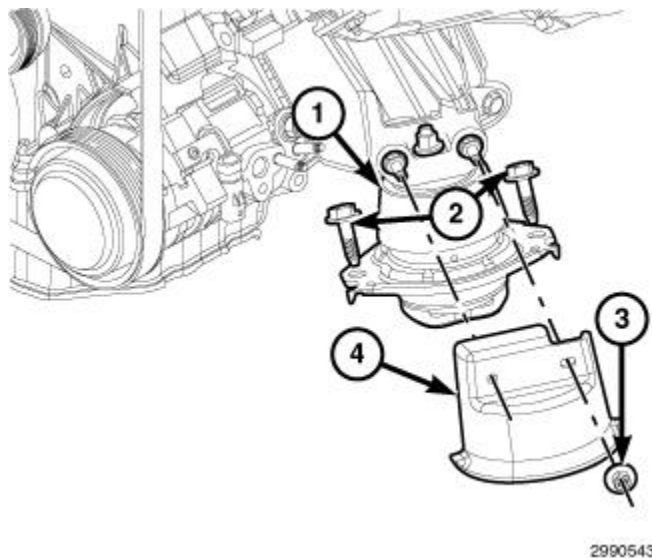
Engine Mount Heat Shield Retaining Nuts, Lower Mount Retaining Bolts & Heat Shields
